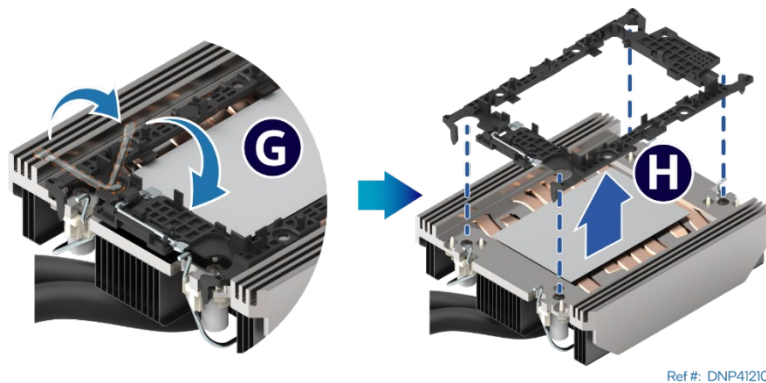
Processor Carrier Clip Removal from Processor Cold Plate
